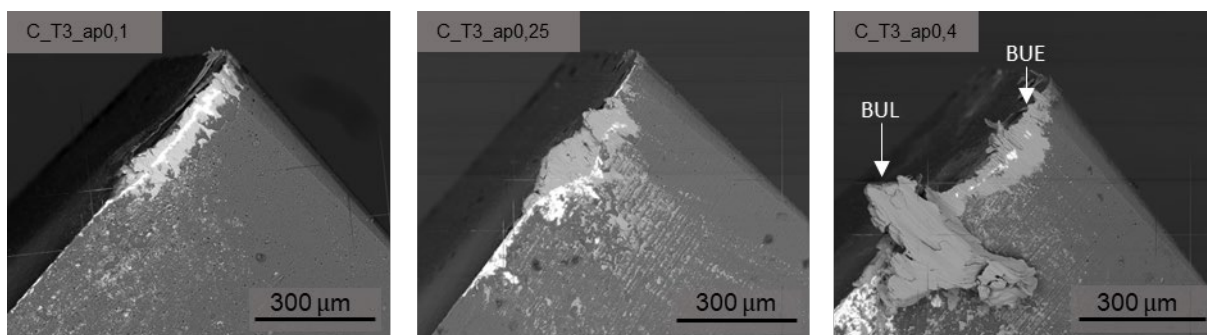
State of the tool flank faces when cryogenic machining T3 samples at varying depth of cut.
